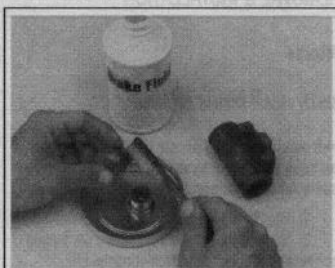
Use brake fluid and a soft brush to clean the pistons . . .
